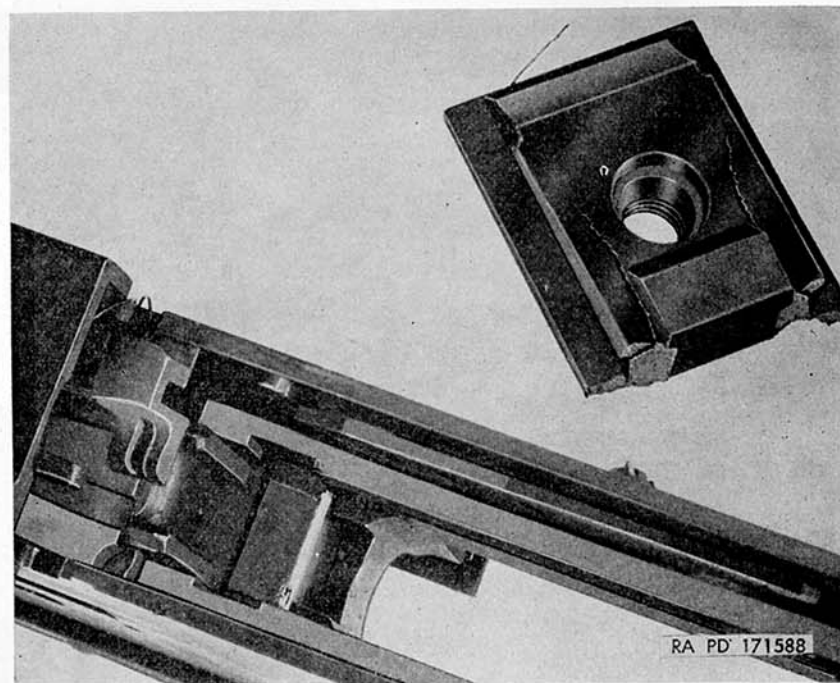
Cal..50 machine gun damaged by insufficient head space.
